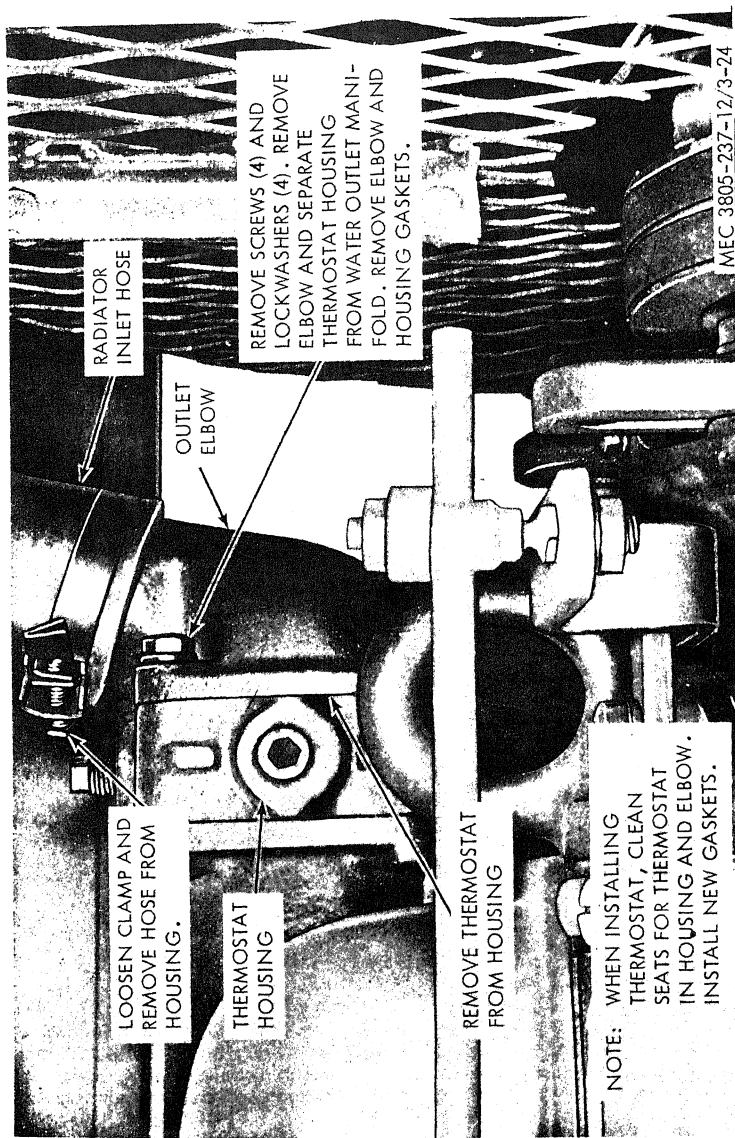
Thermostat and outlet elbow, removal and installation.
